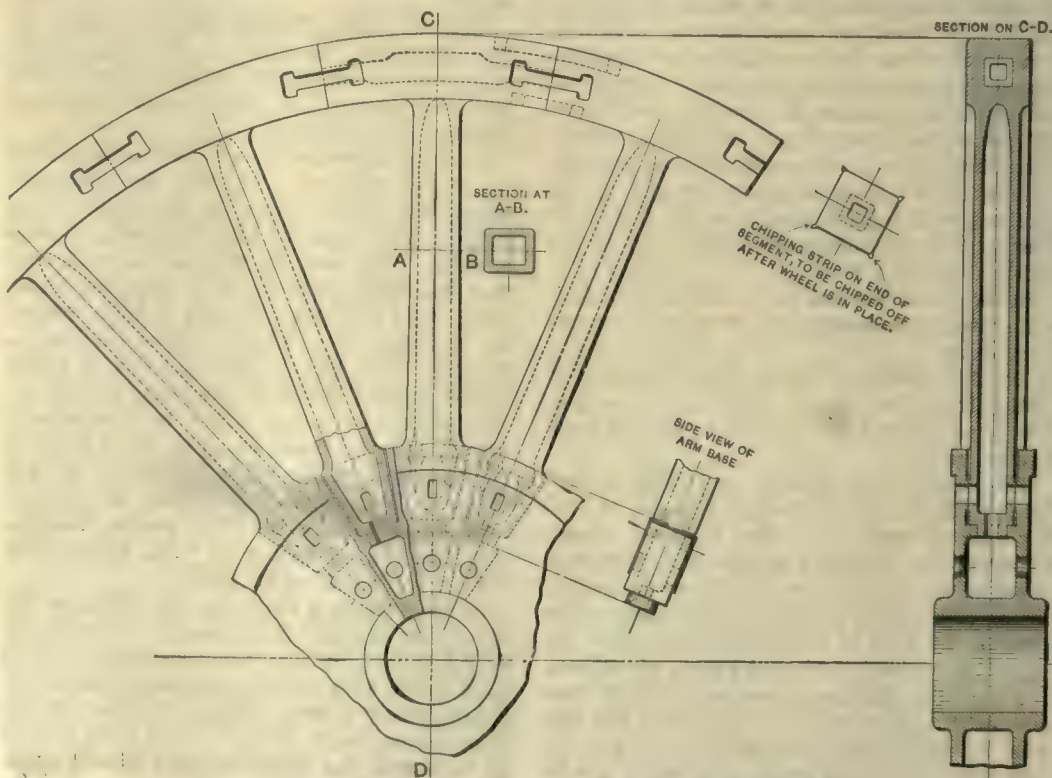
FLYWHEEL FOR A 28-INCH RAIL MILL ENGINE.
